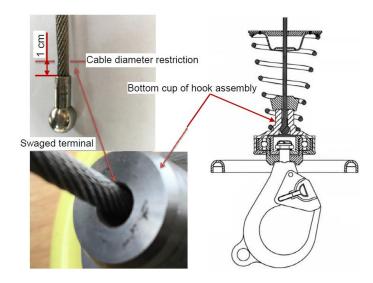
Cable diameter restriction located at edge of bottom cup of the hook assembly
